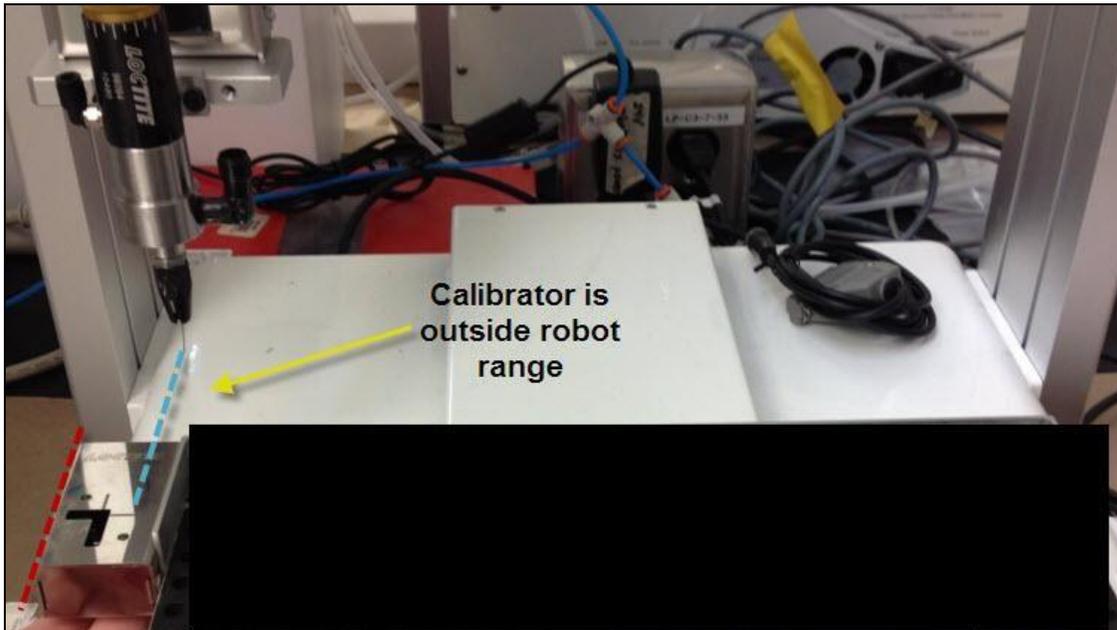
Customer fixture is too large in the X direction; out of range for the robot to reach. Need to mount the calibrator somewhere else. (NOTE: customer fixture blacked out for confidentiality reasons)
